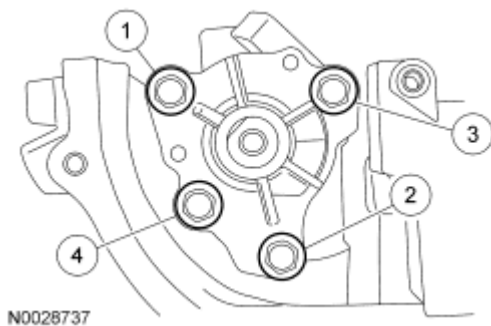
Identifying Tightening Sequence Of Oil Pump Assembly Bolts
